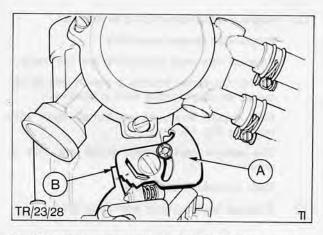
Auto-choke mechanism set in the 'high cam' position A – Fast idle cam B – Choke set on 'high cam'
